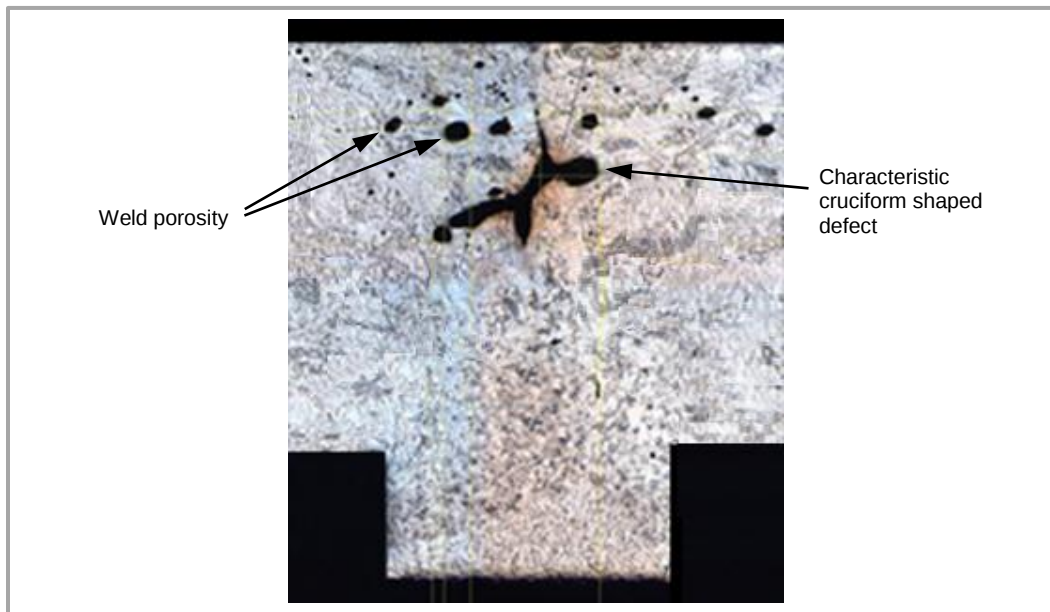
Sectioned weld qualification component illustrating weld porosity
